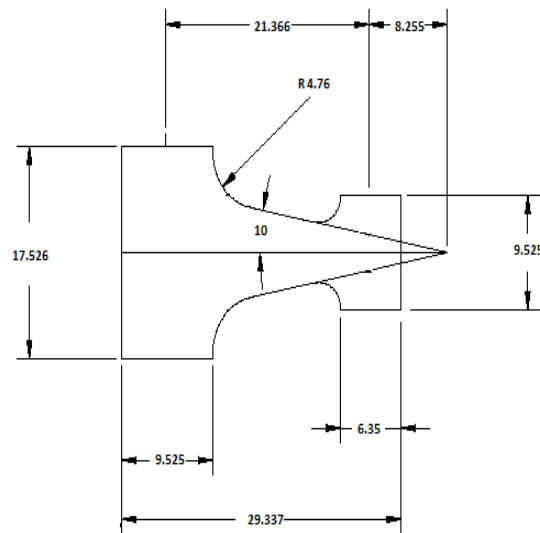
Sketch of the Krouse-type fatigue test specimen.
